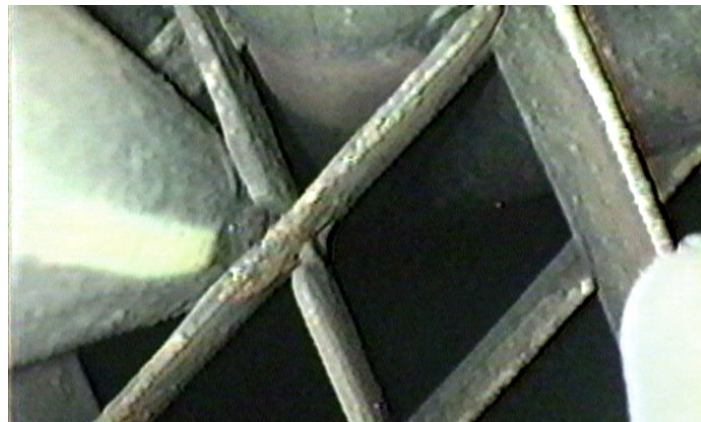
Example Eggcrate Design TSP Visual Inspection
